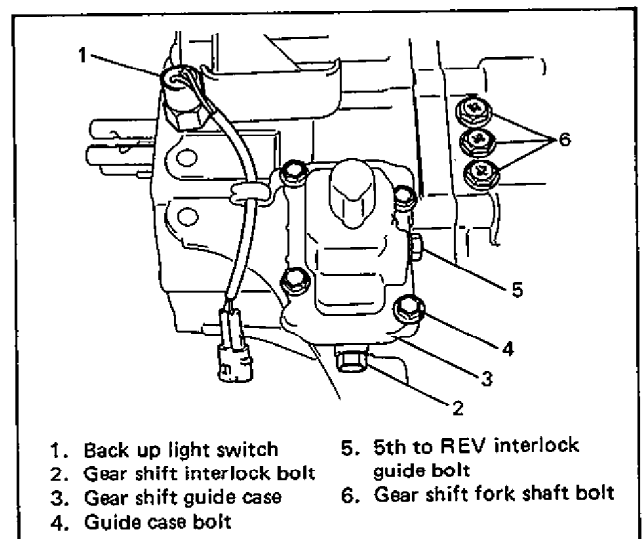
A-29 Removing Gear Shift Yoke Bolt
